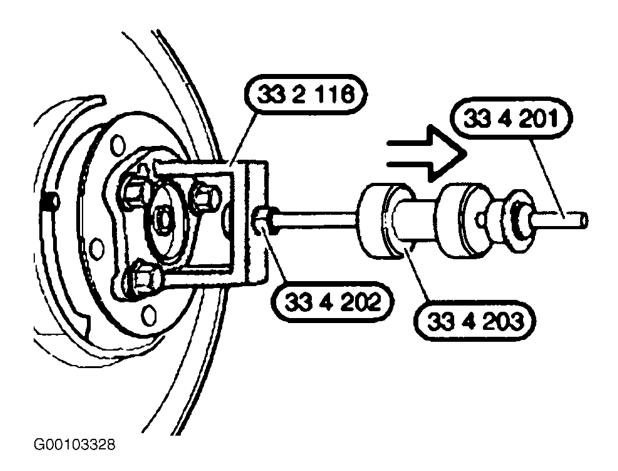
Removing Drive Flange Courtesy of BMW OF NORTH AMERICA, INC.
